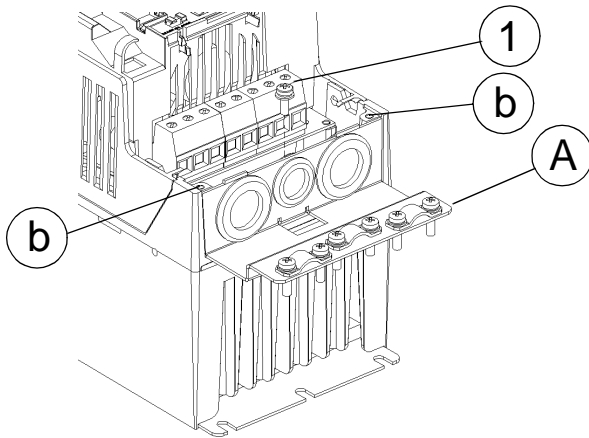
Installing the gland plate for power cables (A), type IP 21 / NEMA 1 drives.
